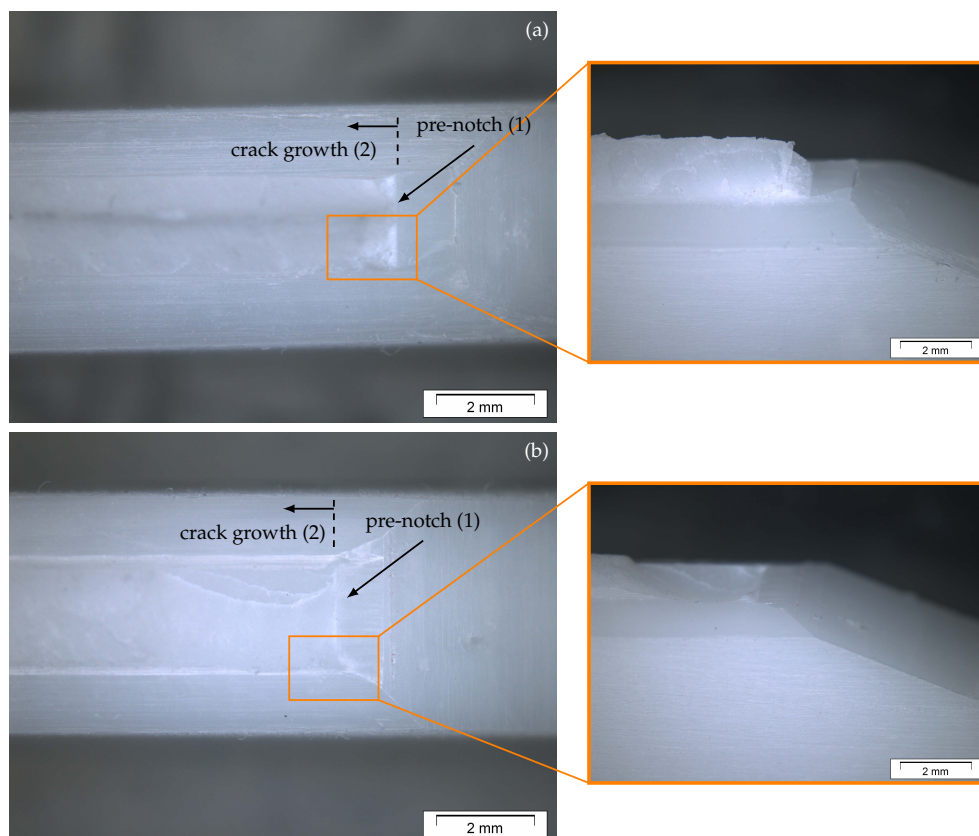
Fracture surface images from two mode III specimens analyzed using a light microscope ($16\times$ magnification). Image of a deflected fracture surface (a) and a flat fracture surface (b)—two different crack areas were observed on the fractured specimen half: pre-notch before testing (1) and area of crack growth during testing (2).
